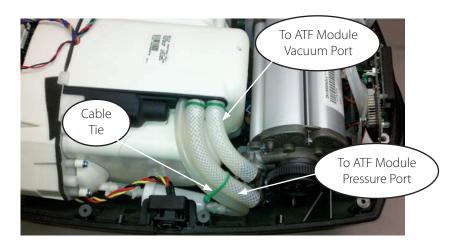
Removal of ATF Module Pressure and Vacuum Tubes.
